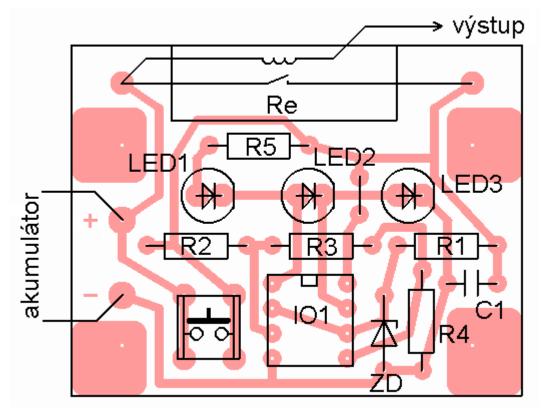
Layout of the components on the board Fig. 4. Locations of components on the board
